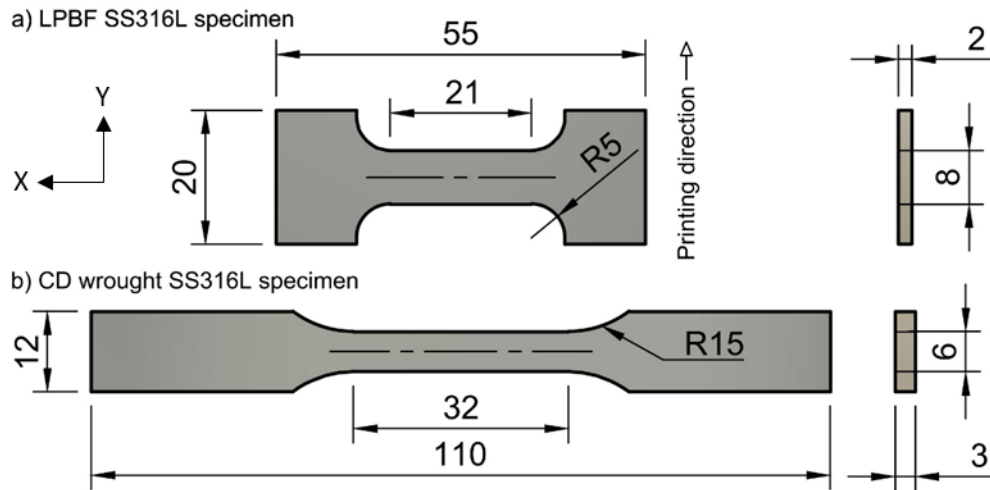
Geometry of the rectangular specimens used for the tensile tests a) LPBF-manufactured SS316L, and b) machined CD wrought SS316L. The extrusion direction of the rod bar is in the X axis. Units in millimetres.
